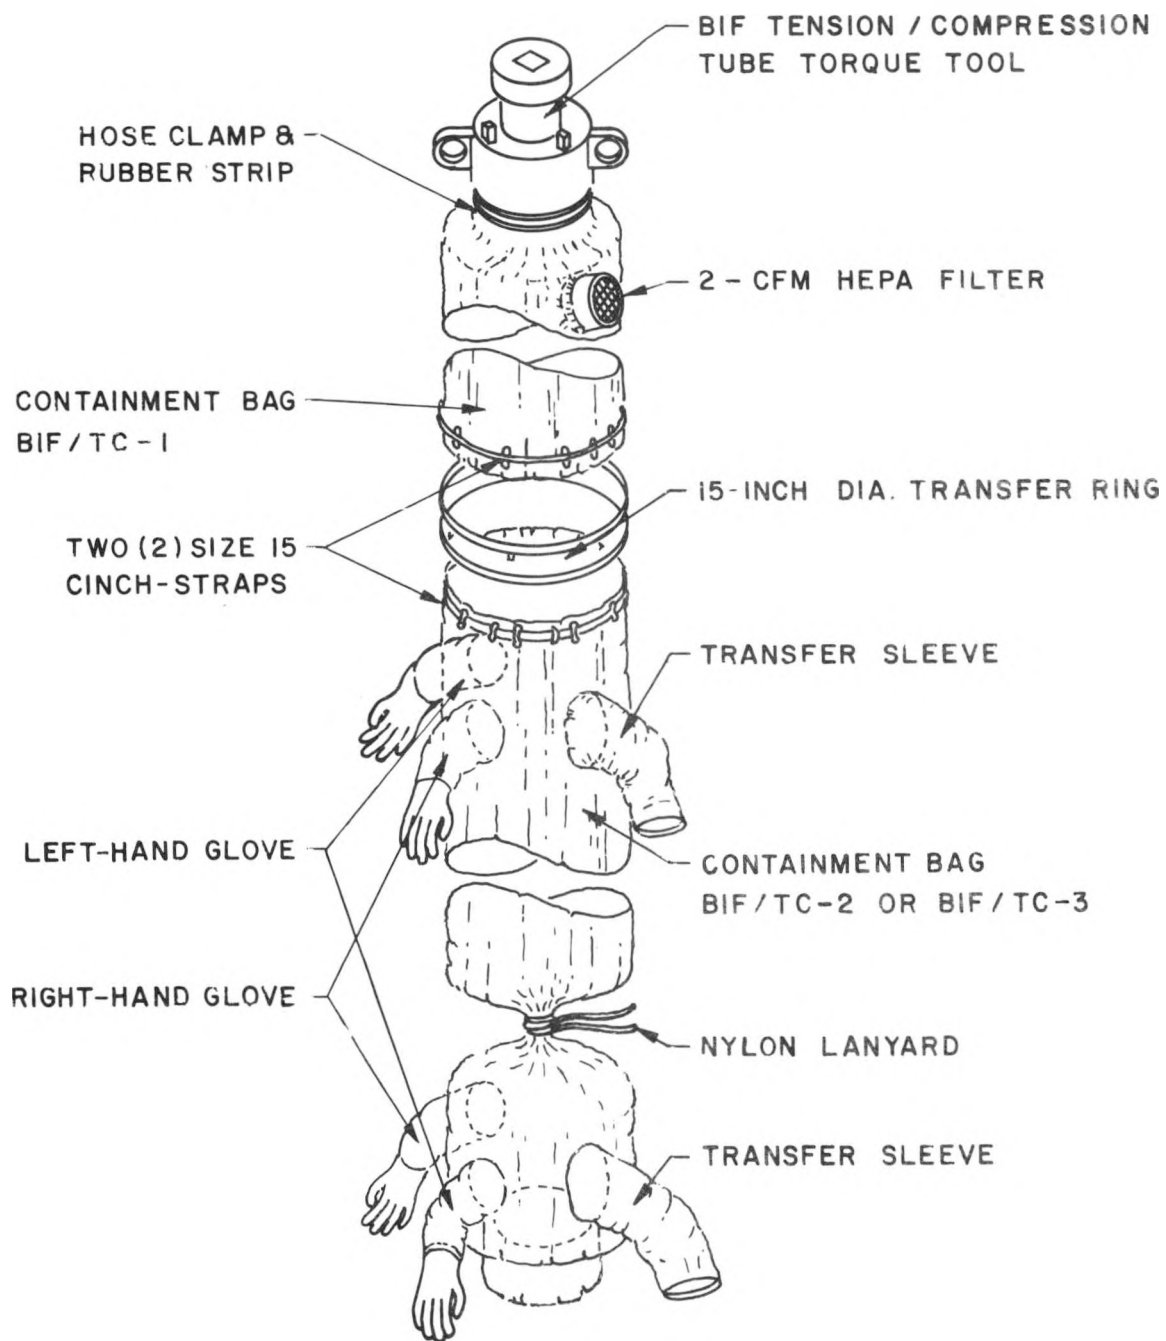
Two-Part Containment for BIF Tension/Compression Tube Removal
